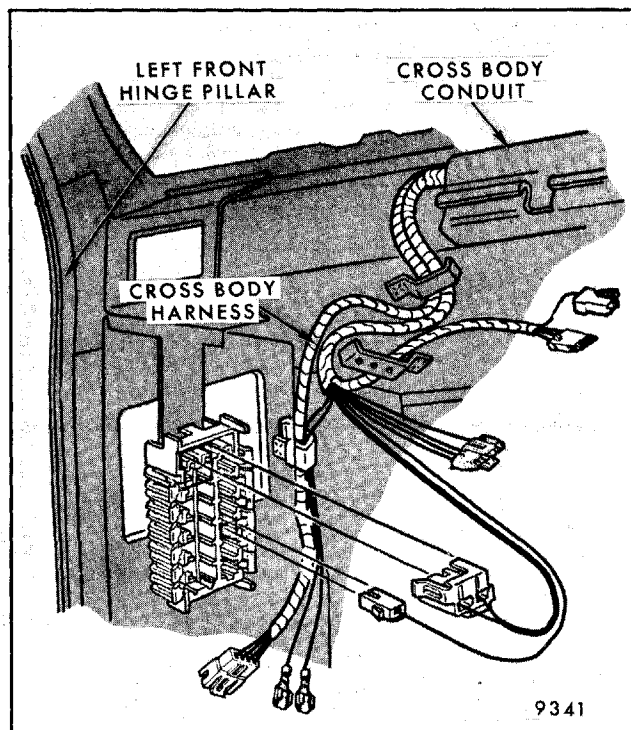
Accessory Junction Block (left Side Shown, Right Side Similar on "B,C,D,E and K" Styles)
